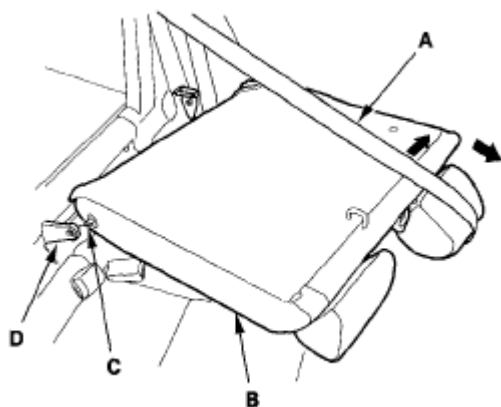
Removing Left Seat-Back Extending Rear Center Seat Belt
